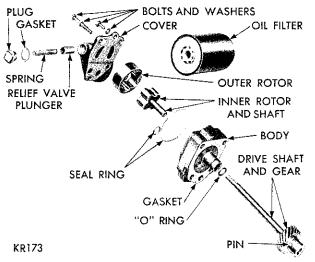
Oil Pump and Filter Assembly (Disassembled View)
